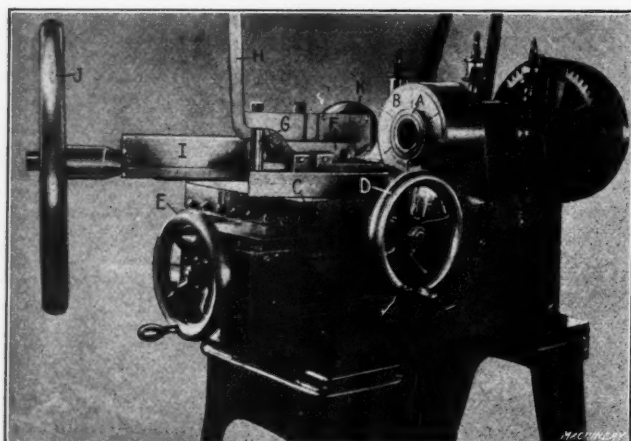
Spinning the Edge of the Shell over the Assembled Bearing
